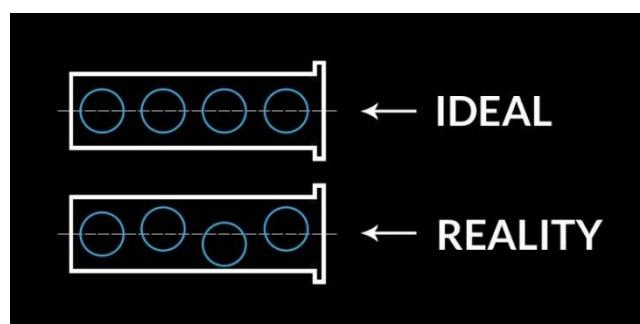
The primary manufacturing flaw associated with most pin & tumbler locks (Goodman 2017)
